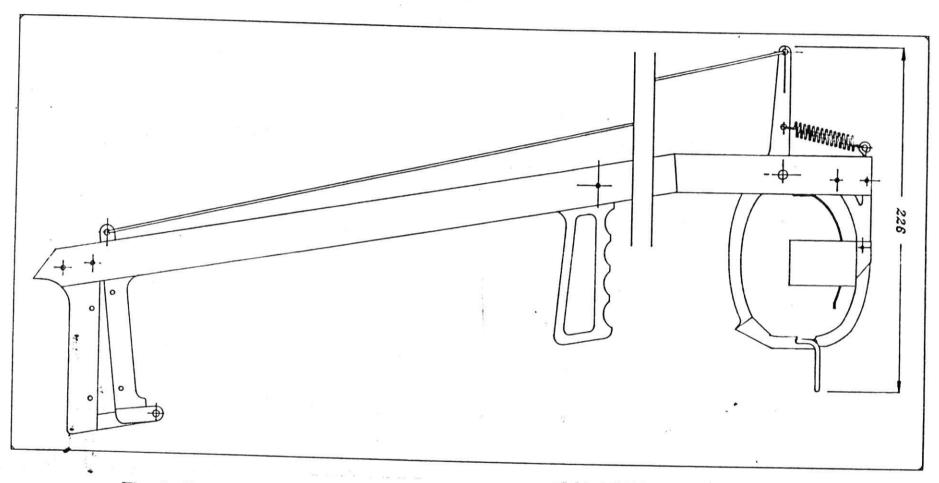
Tool configuration based on the principle of cutting a piece of the pad
